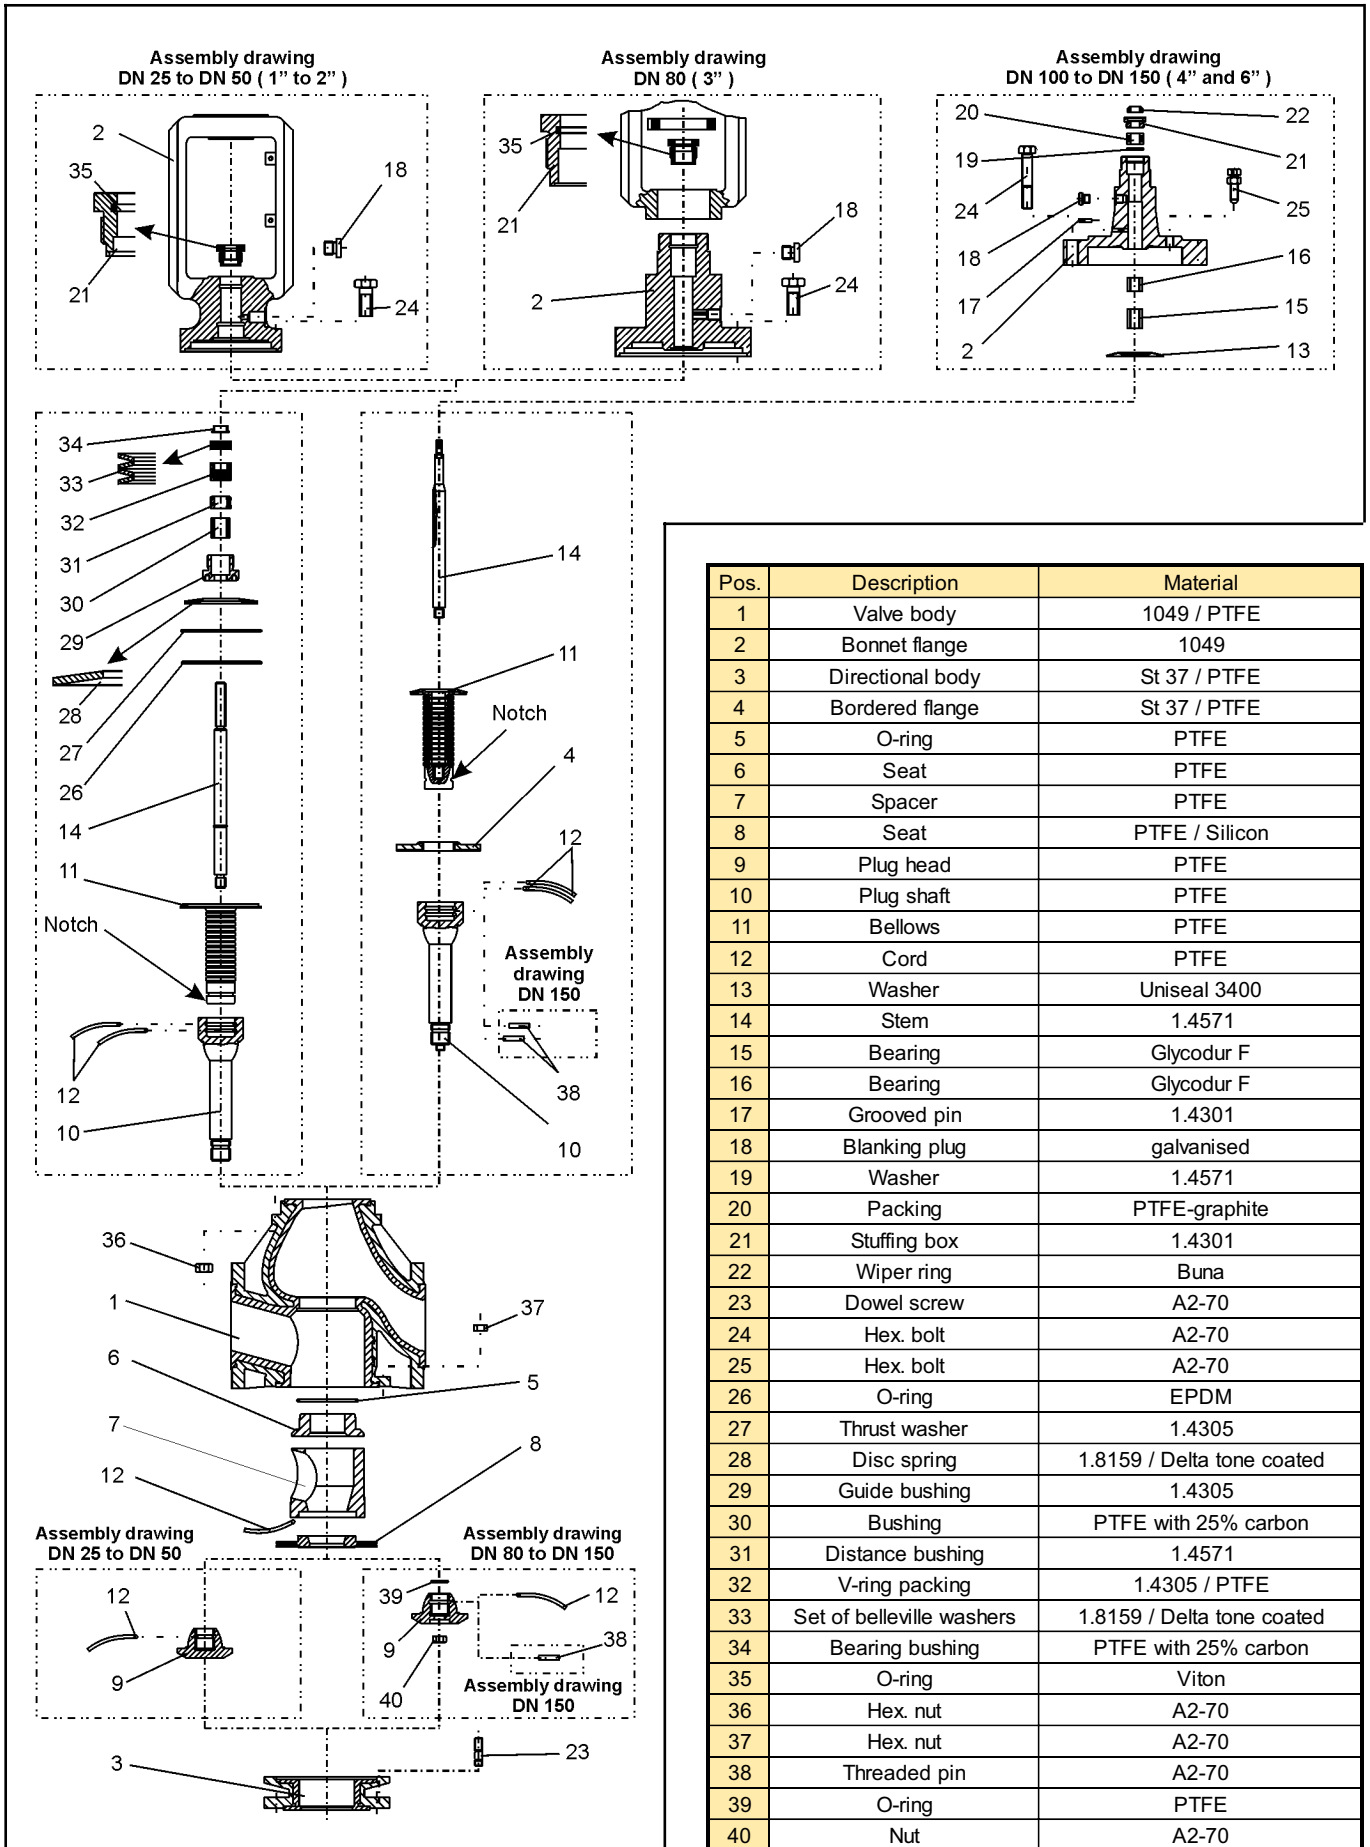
Explosion drawing of the 3-way control valve, series 1d
